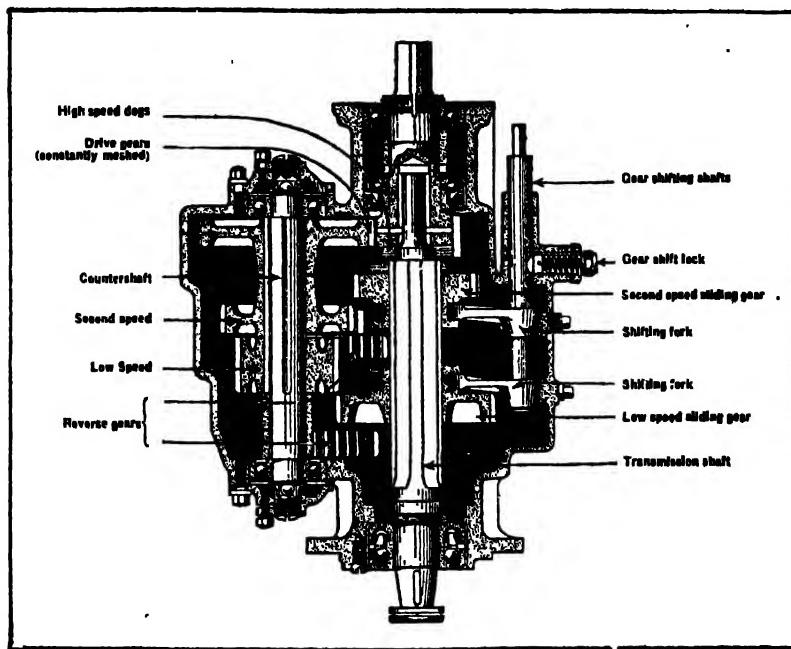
Three Speed Sliding Gearset, Forming Part of Rear Construction of Overland Automobiles.
